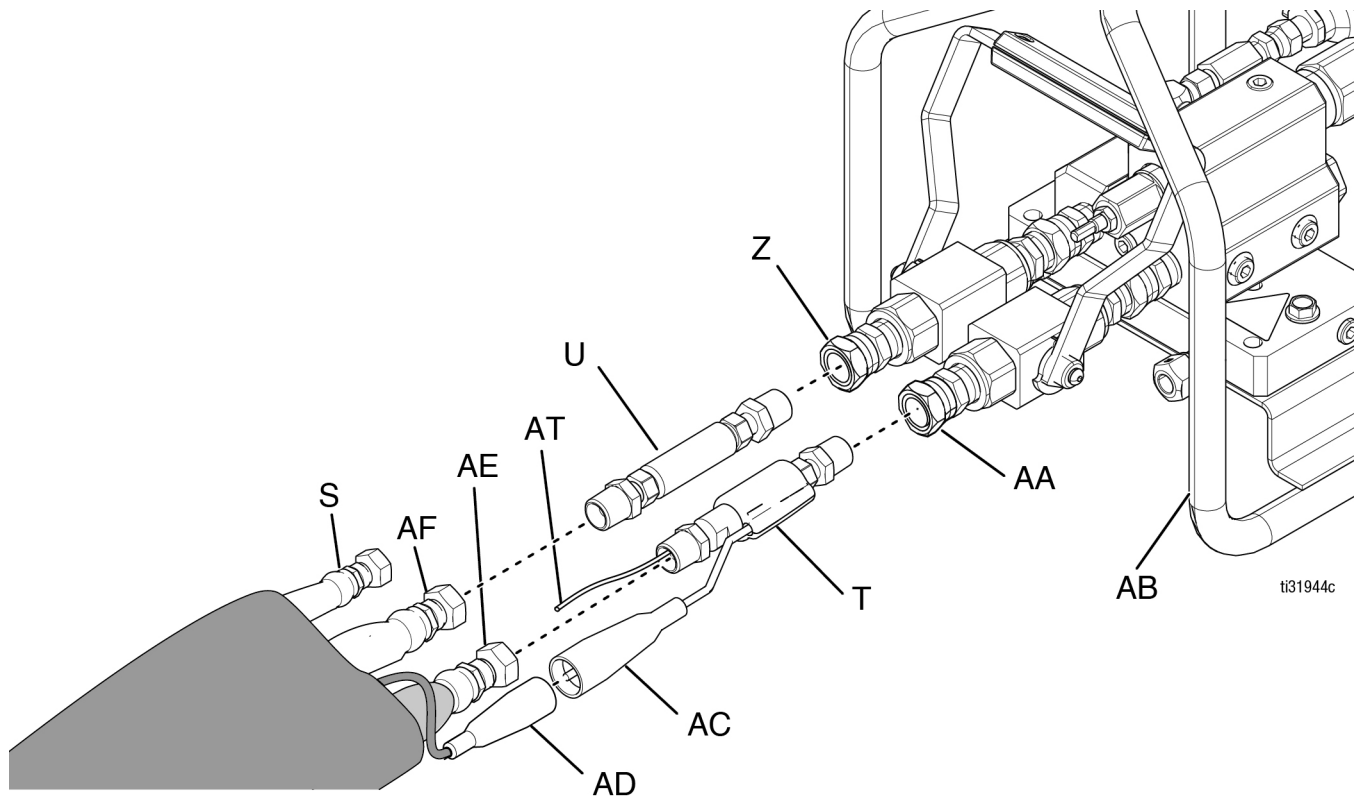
Connect FTS/Coupler to Hose and Mix Manifold
